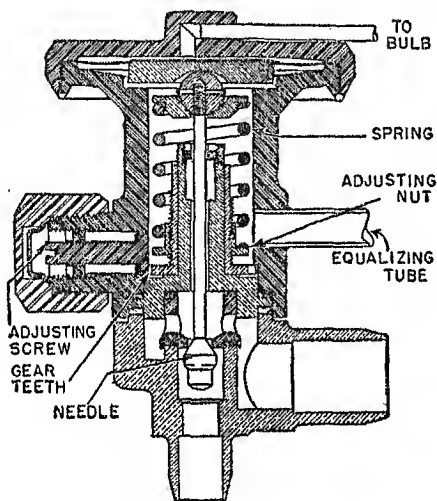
Diaphragm Type Thermostatic Expansion Valve with Geared Adjustment.
